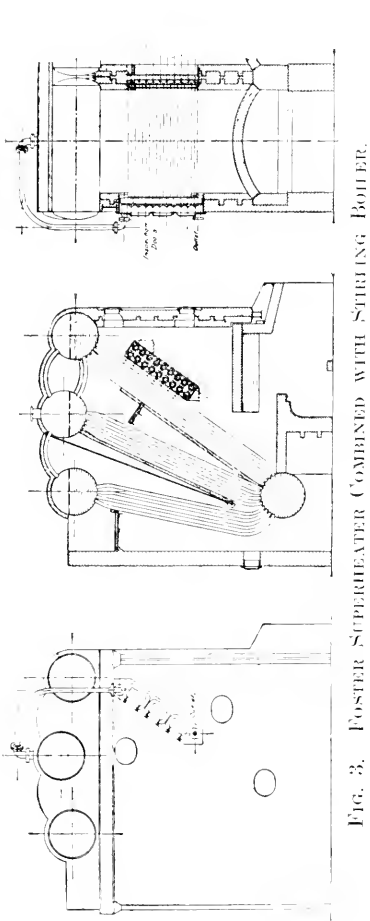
FOSTER SUPERHEATER COMBINED WITH STRING BOILER.
